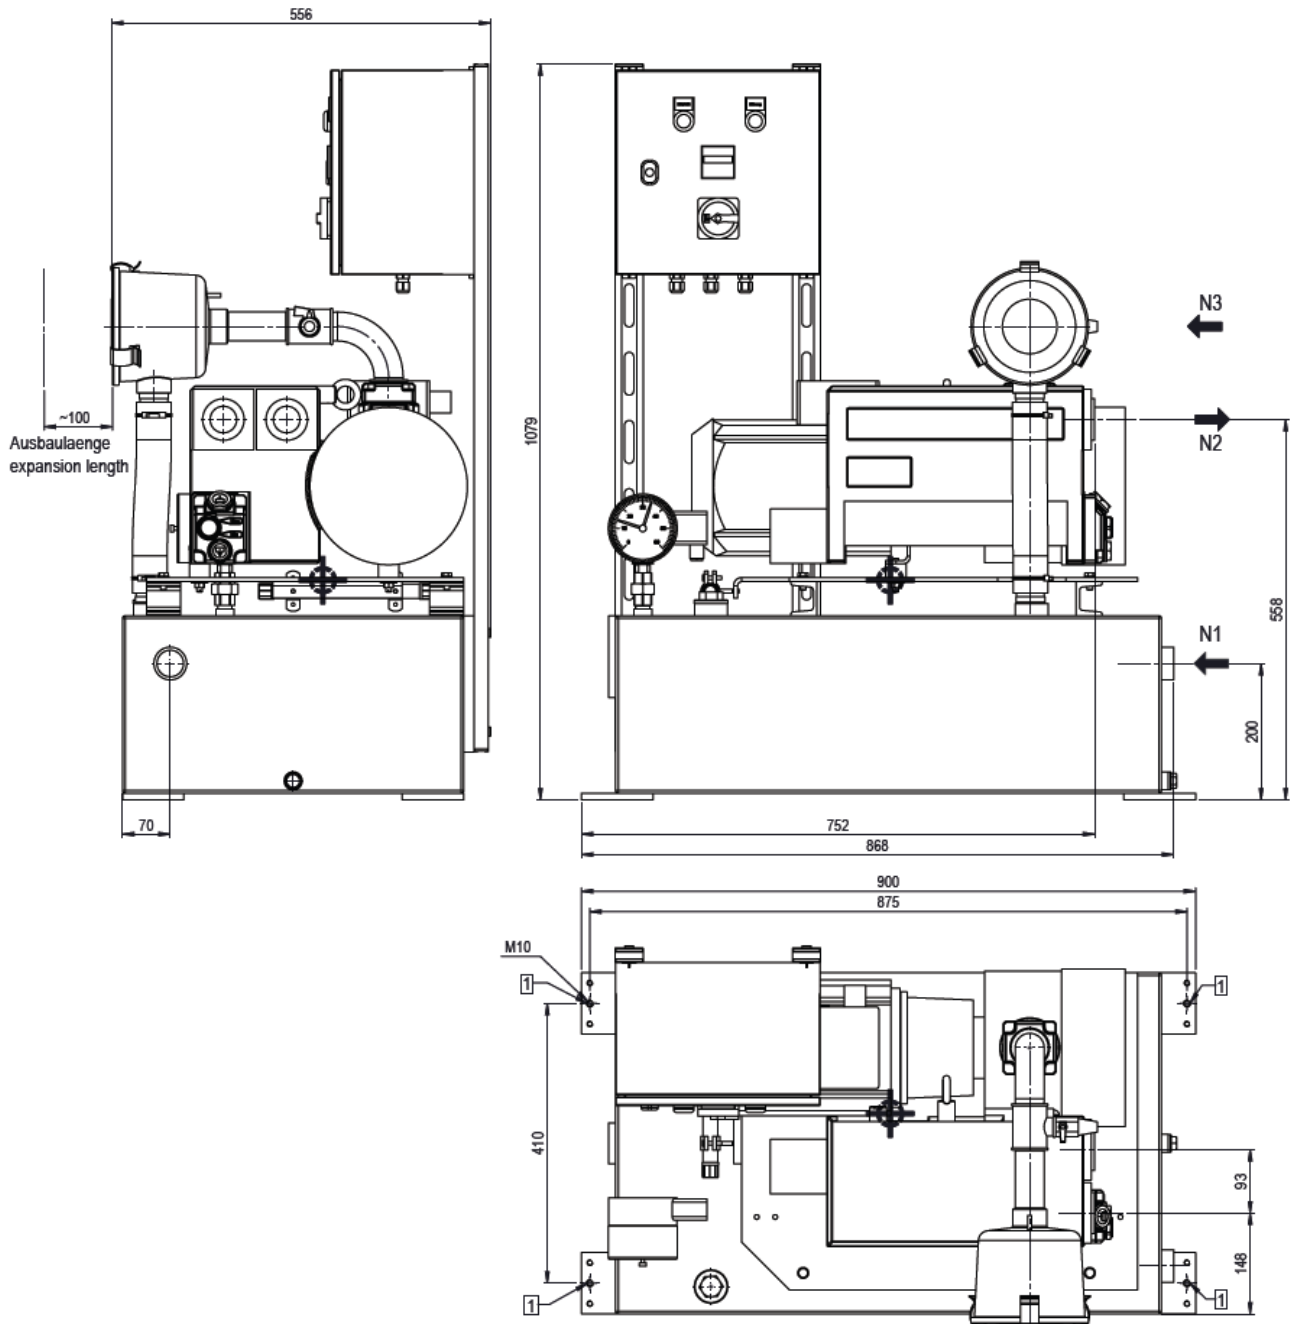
Dimensions vacuum system VD 0063 G AAA TCXX
